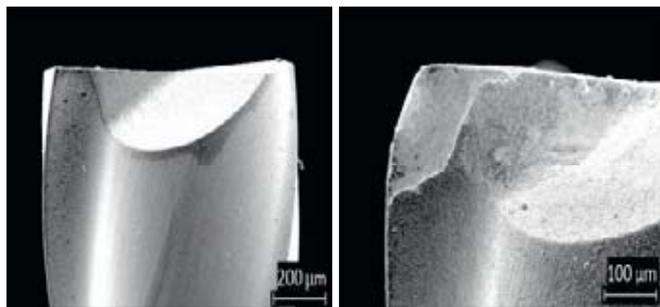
(a). New Cutting Tool, (b) AlCrN Coated Tool After Machining of 2mm Depth of Cut [4]
